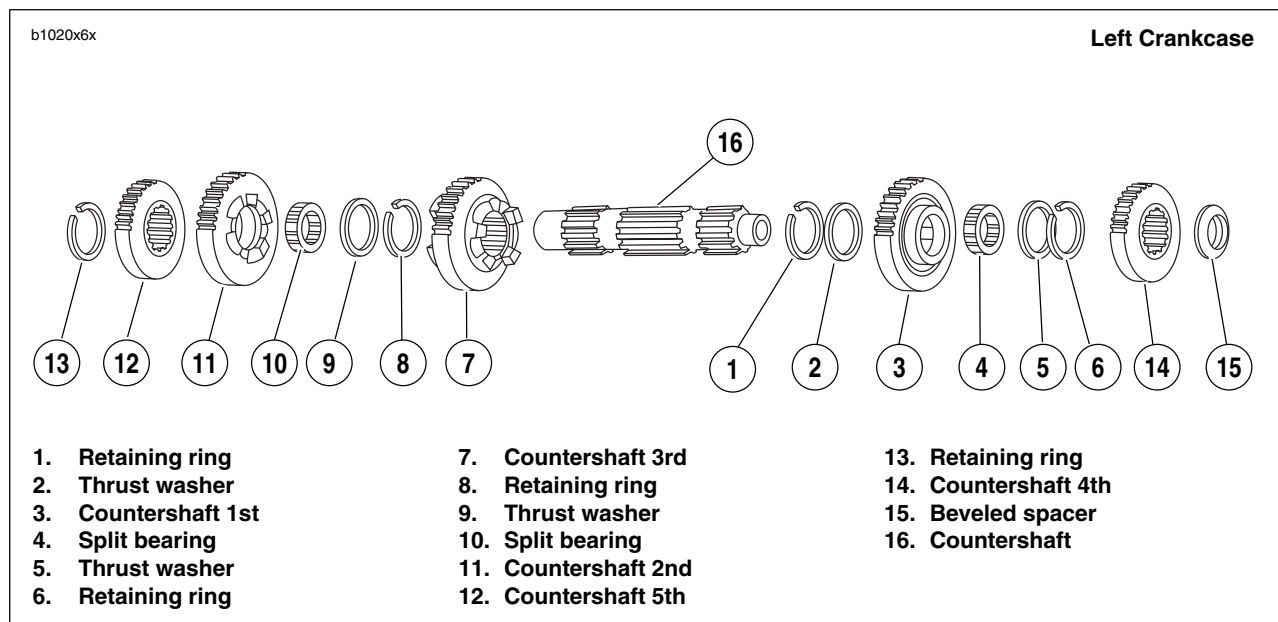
Transmission Countershaft Assembly/Reassembly
